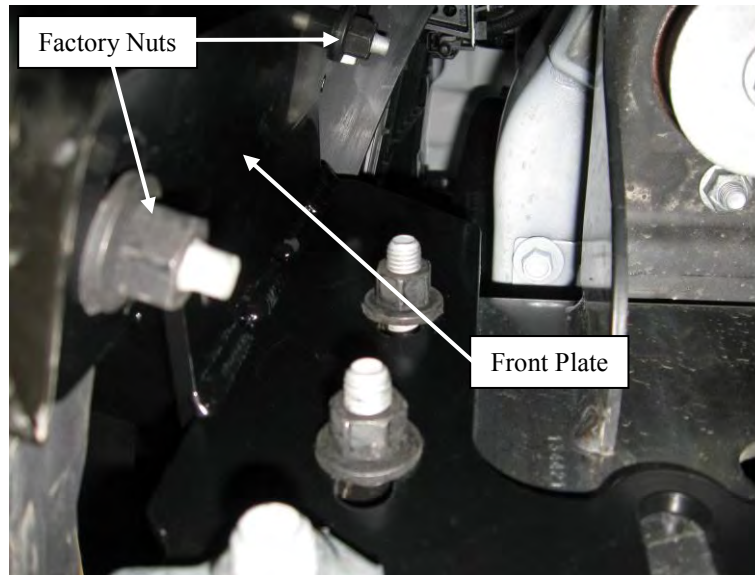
Large Frame Carrier: Bumper Factory Nut Positions.
